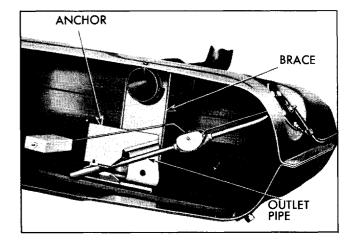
Fuel Gauge Tank Unit Installed in Tank
